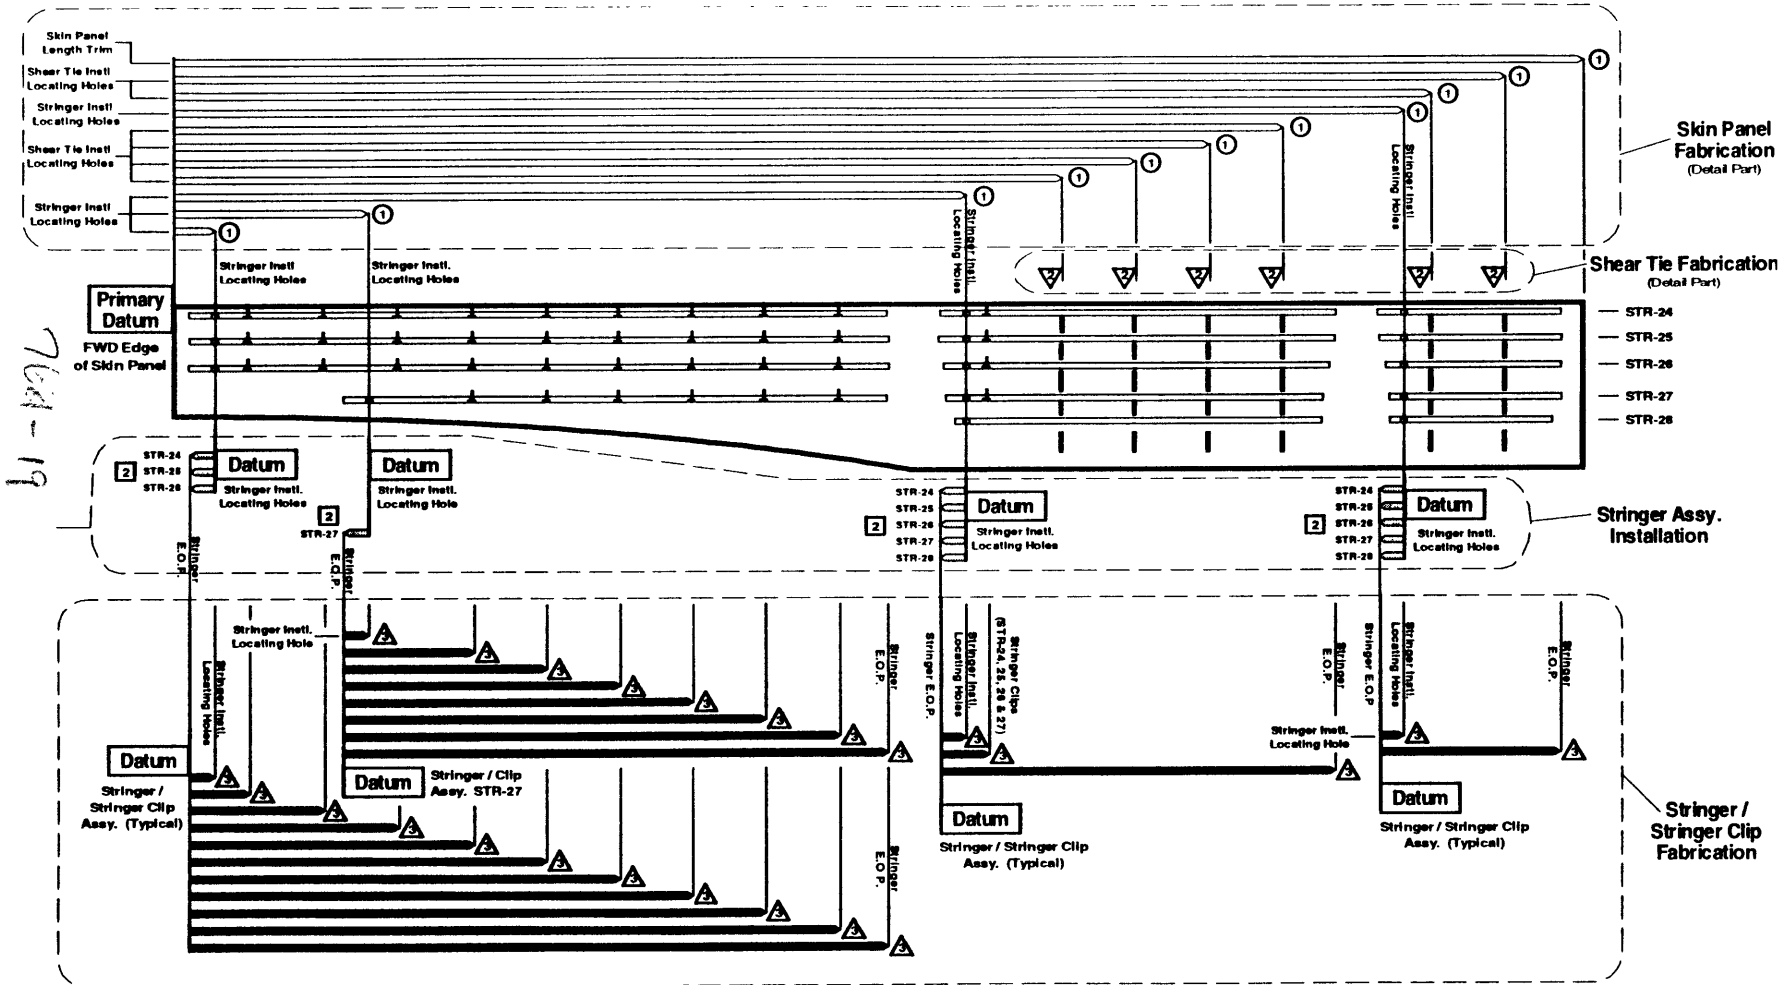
DFC for final stage assembly of the side skin panel at CC 320
